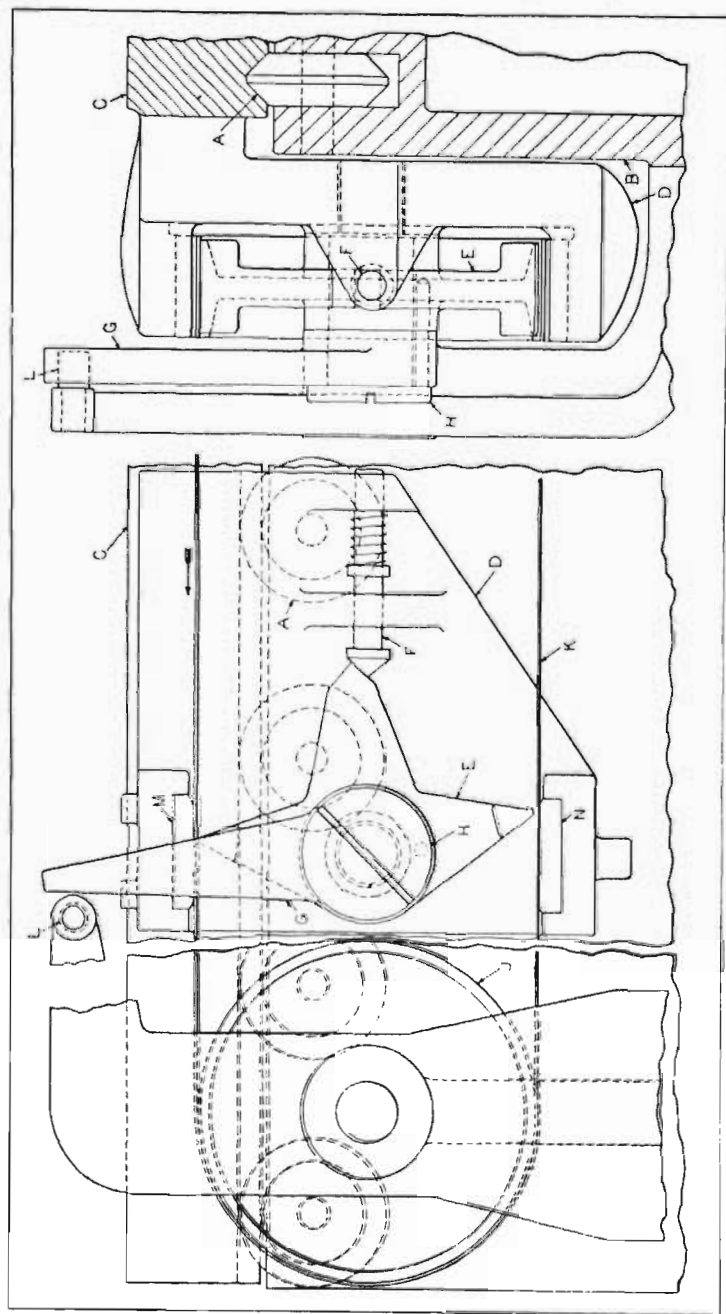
Mechanism Used on Machine Table to Alternately Engage the Upper and Lower Sides of a Horizontal Belt, thus Obtaining a Reciprocating Motion
